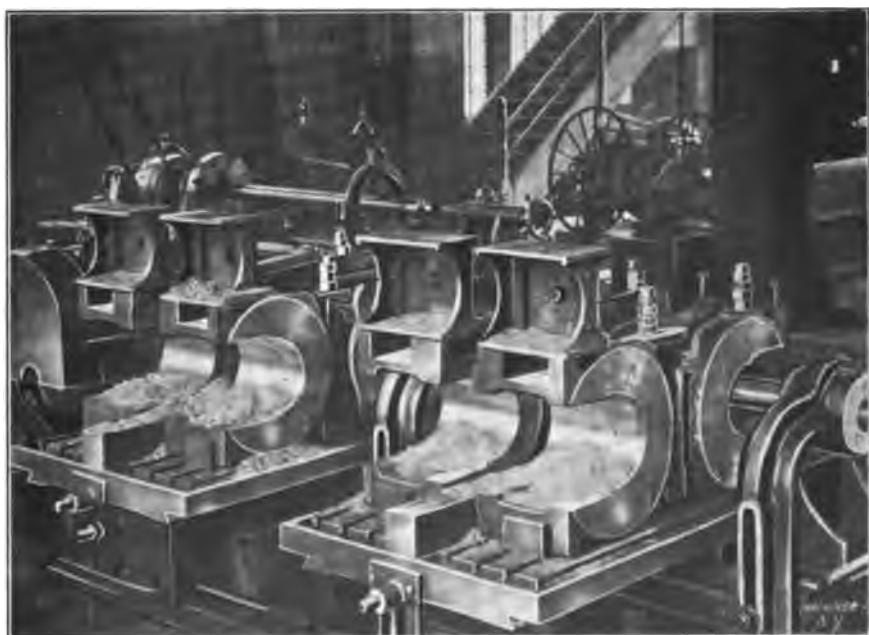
The Work Completed. Finished Bearings ready for Removal from Boring Machine
